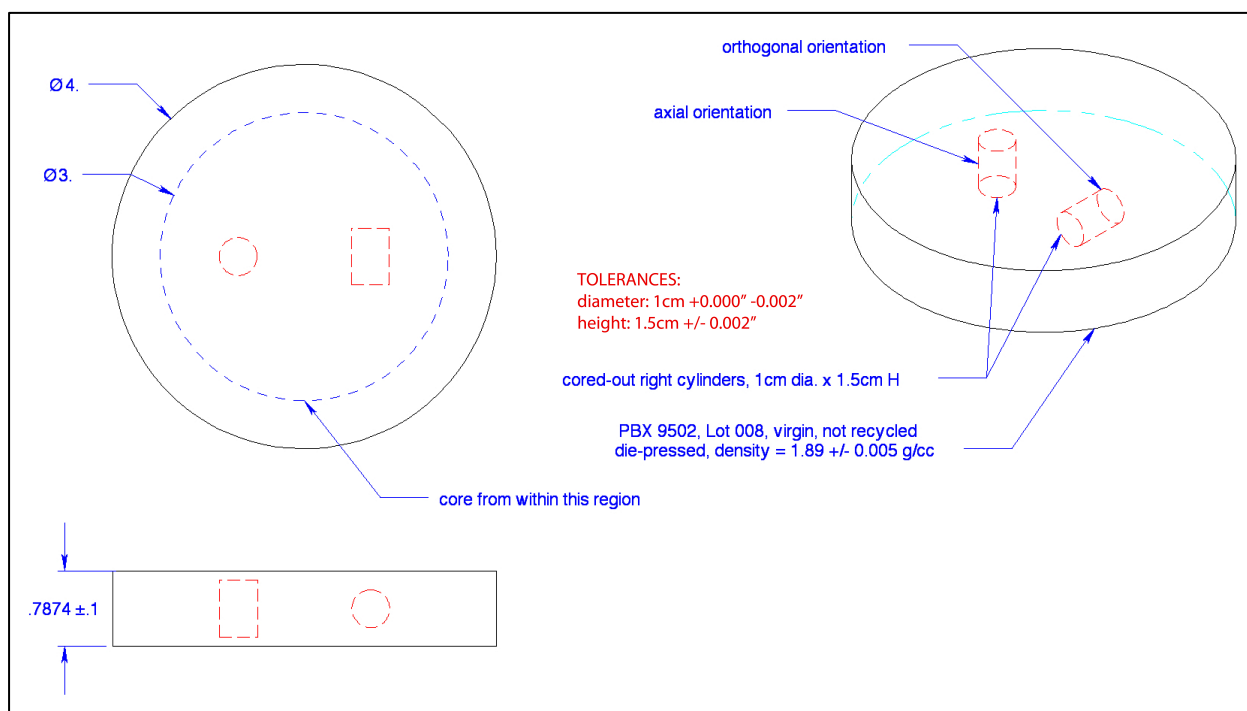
Samples were machined out of a uniaxially pressed billet in the two orientations shown here.
